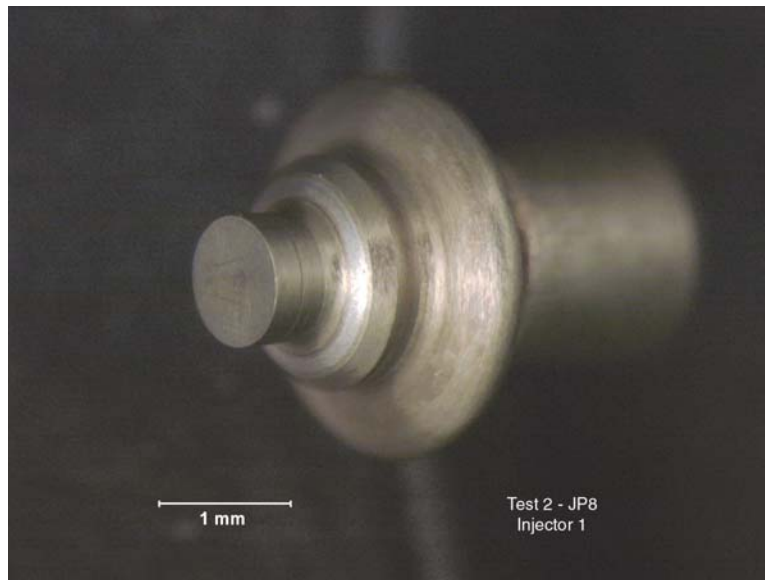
AF7801 JP8, Fuel Injector Control Valve
